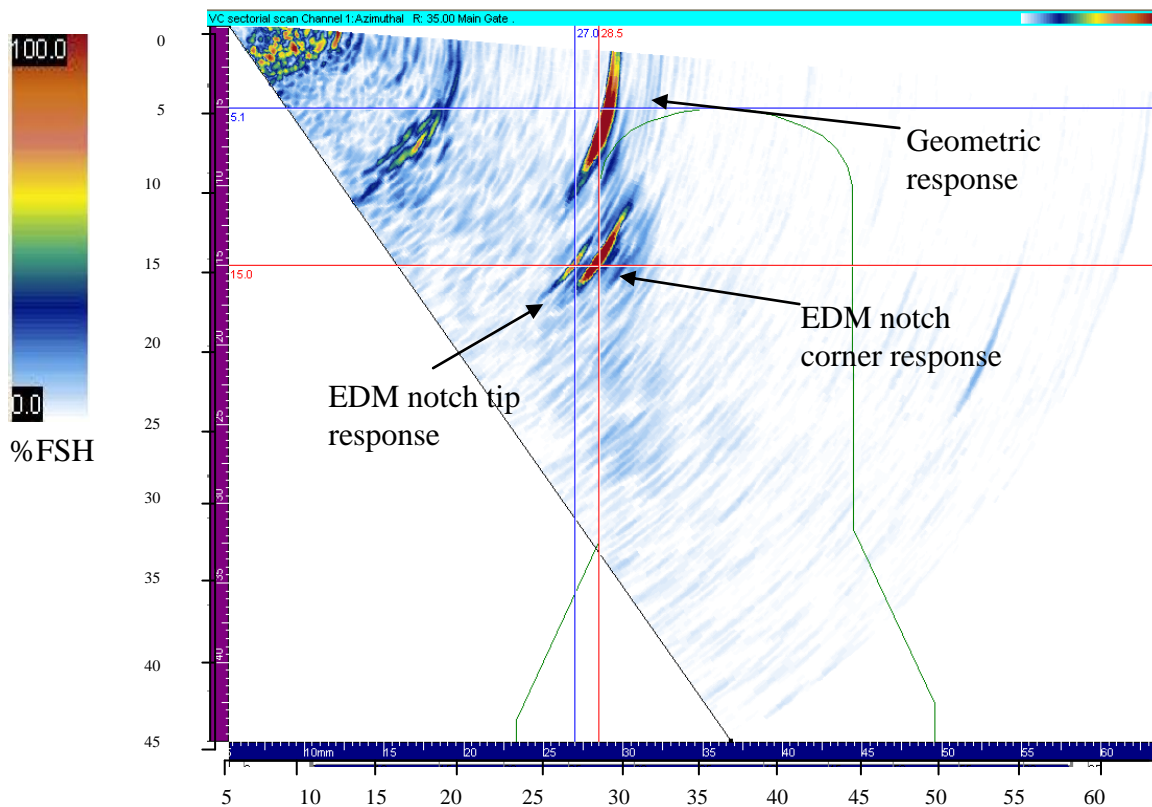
Sector scan of reference blade using rapid prototyped inspection jig (scale in mm)
